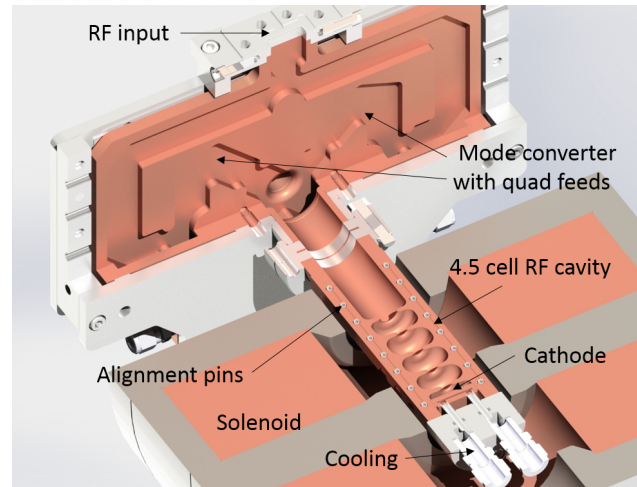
Cutaway view of photoinjector assembly including mode launcher with quadrupole symmetry, 4.5 cell RF gun, and solenoid magnet.
